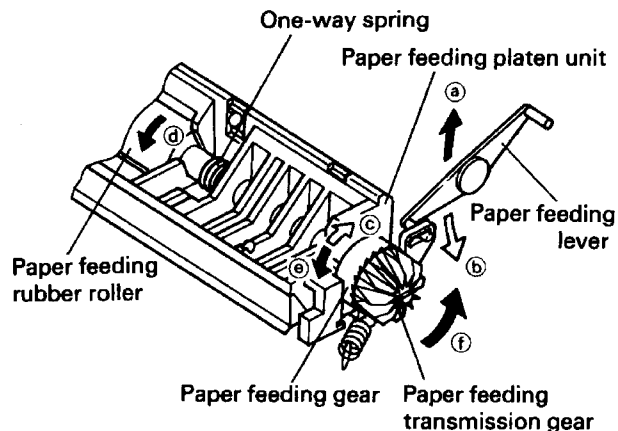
Operation of the Paper Feeding Gear and Paper Feeding Transmission Gear
